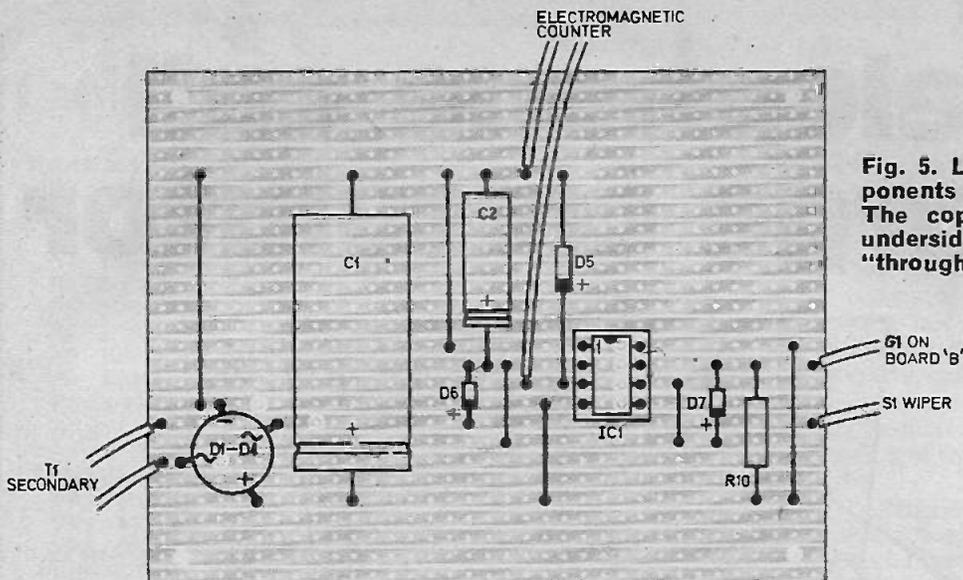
Layout of the components on the main board. The copper strips on the underside are shown tinted "through" the board.
